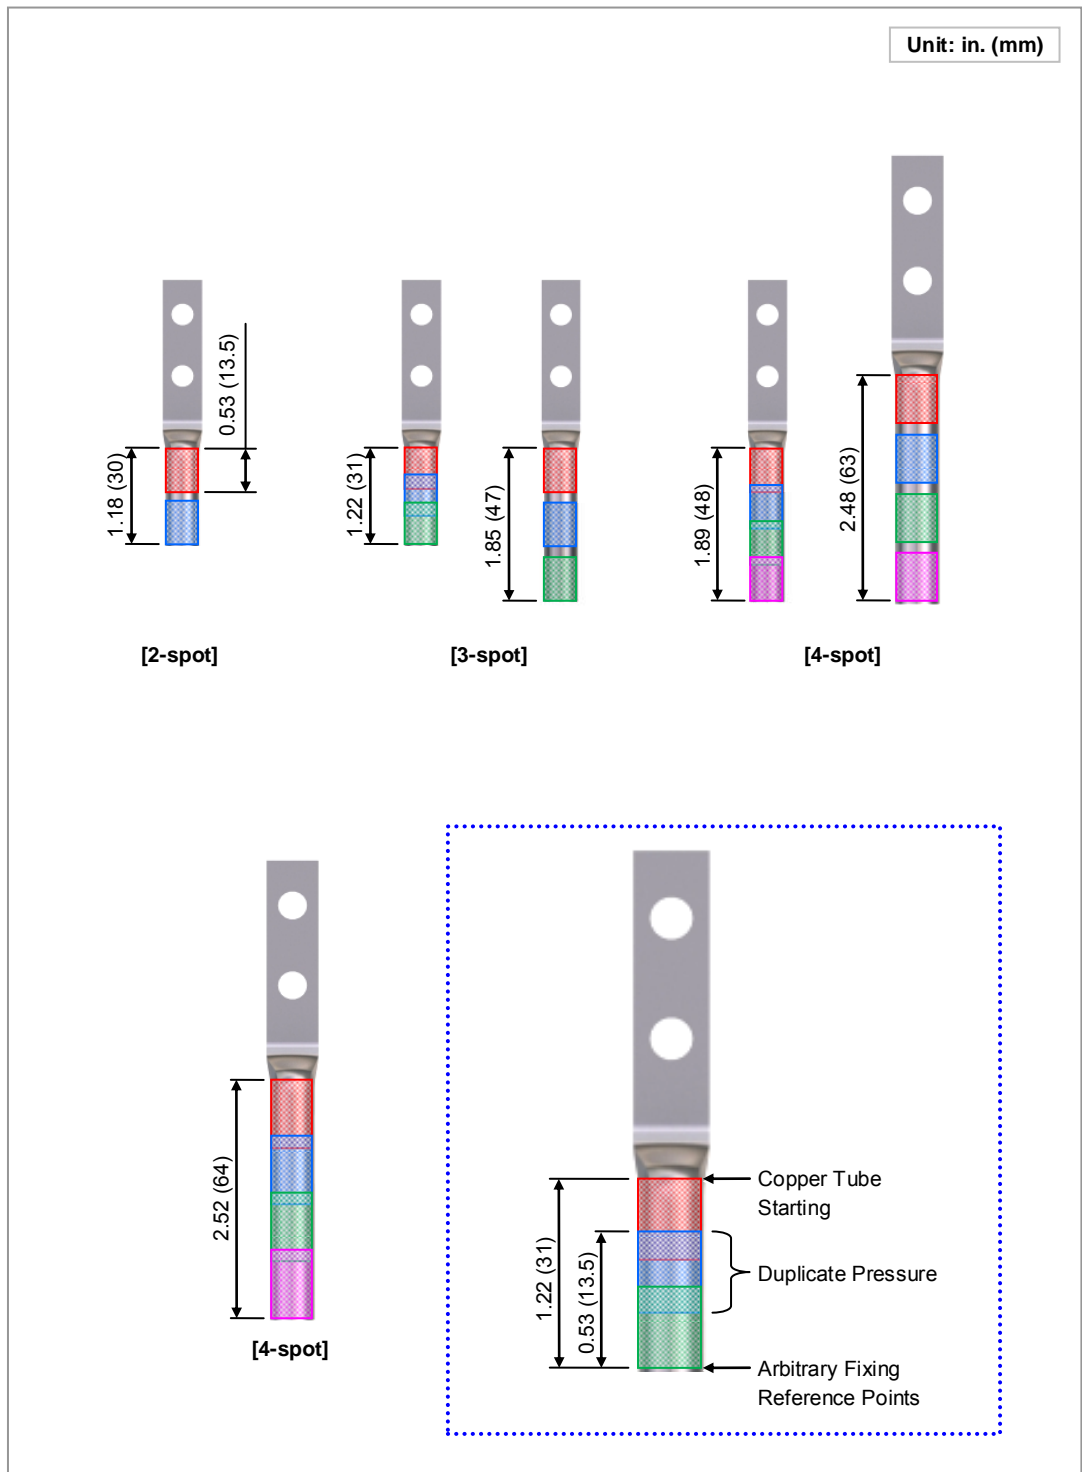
Pressure Reference Drawing (Hydraulic Press)
